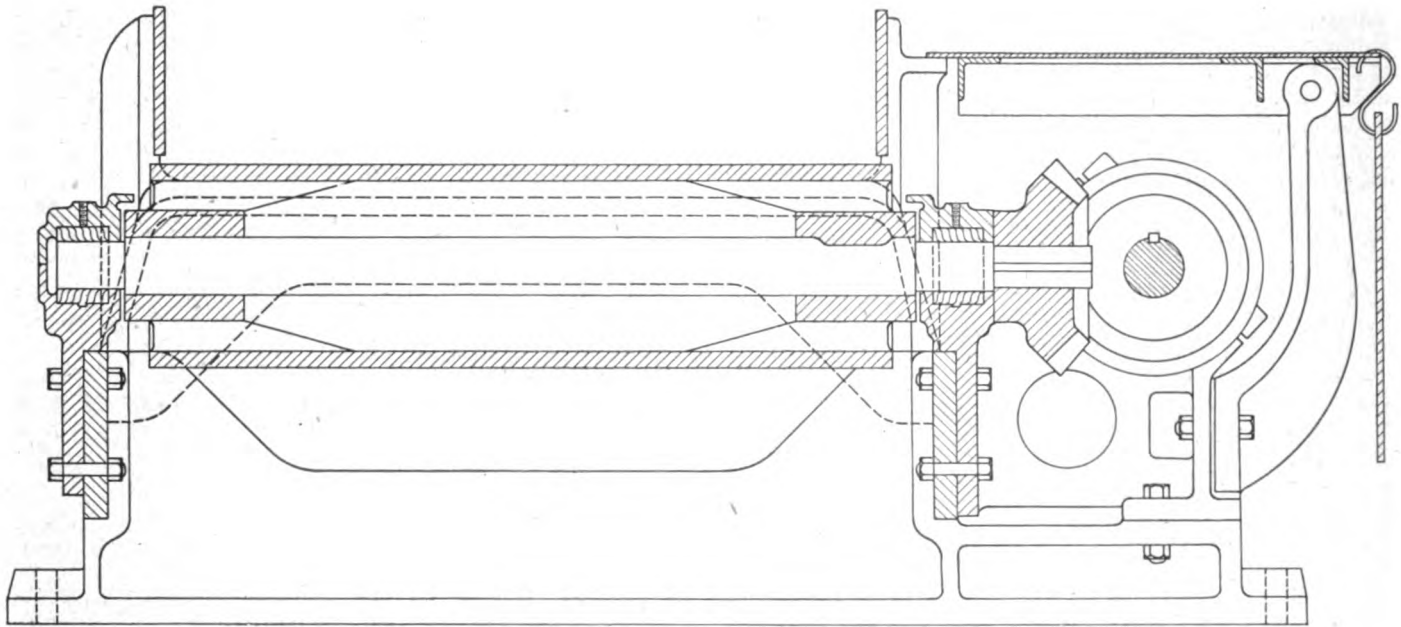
Design of Hyatt equipped approach and runout tables for 24-in. sheet bar mills at International Nickel Company and Mansfield Sheet & Tin Plate Company.
